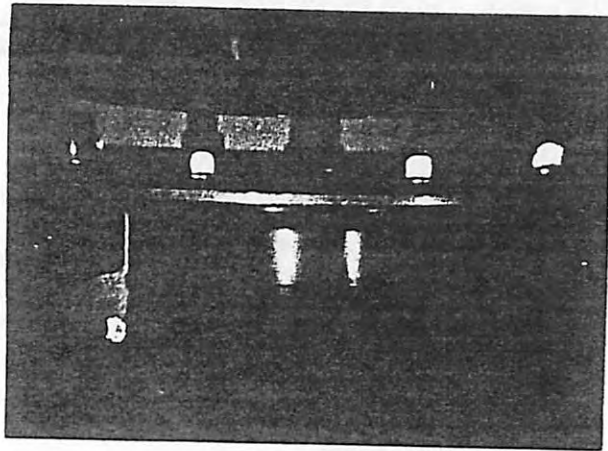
FCA Weld Joint (/) as Viewed Through the Questar Telescope.
